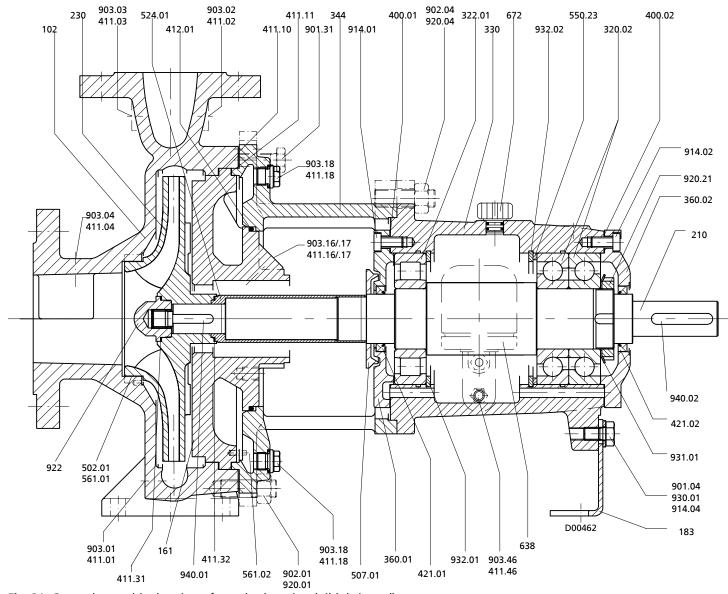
General assembly drawing of standard version (oil-lubricated)
